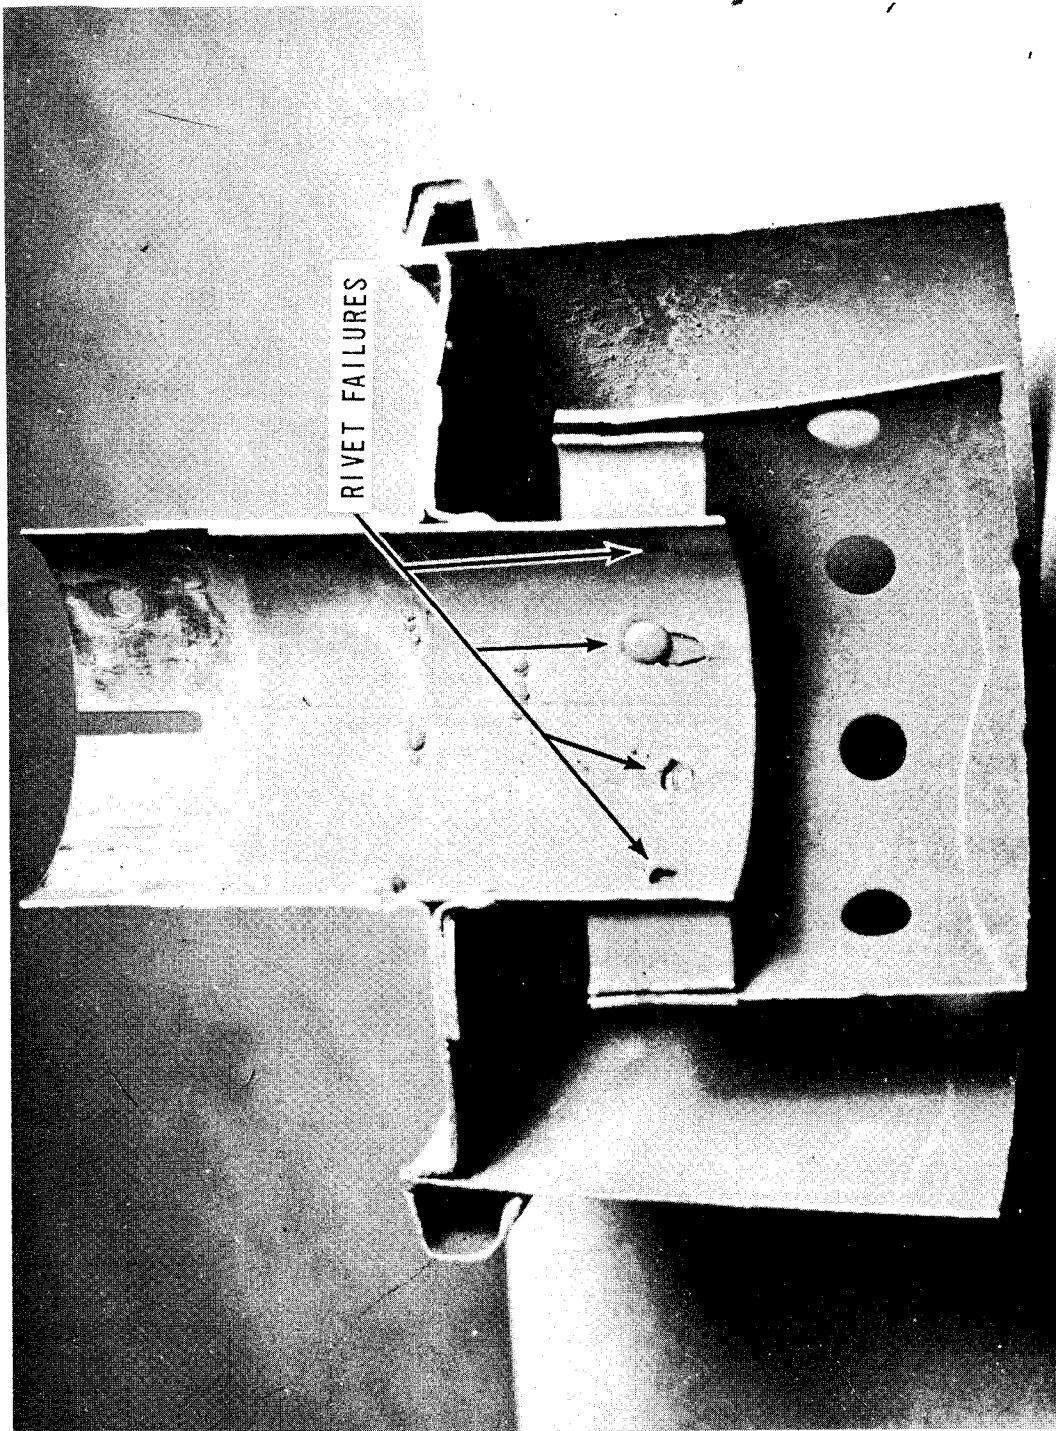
FAILED BAFFLE TUBE RIVETS, MUFFLER
